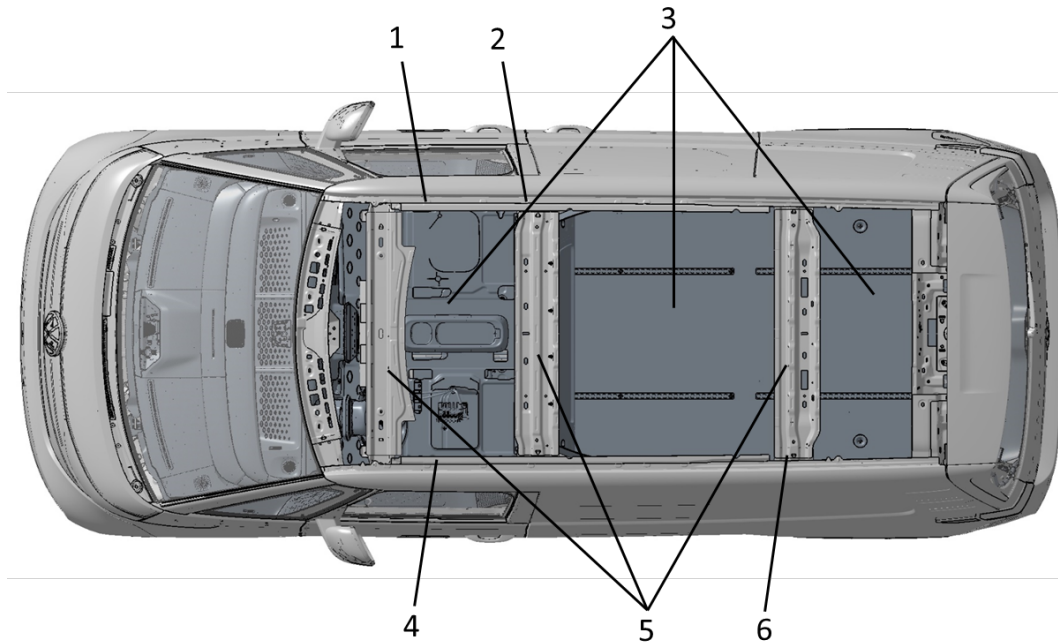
Subsequent roof cut-outs (schematic diagram)
